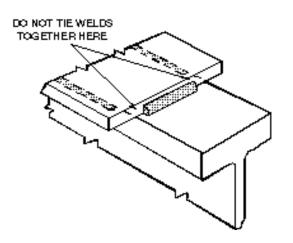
Fillet Welds on Opposite Sides of a Common Plane of Contact (see 2.4.7.5)
